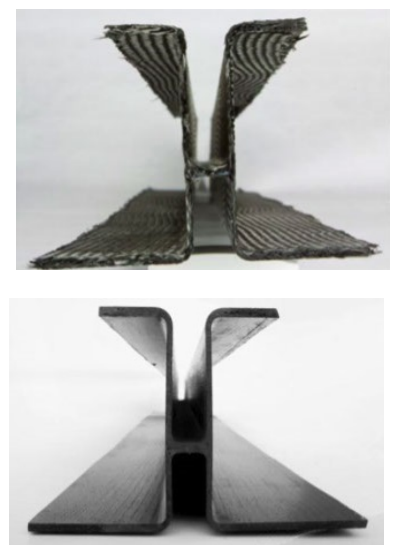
(Top) dry preform and (bottom) final molded CFRP part [12].
